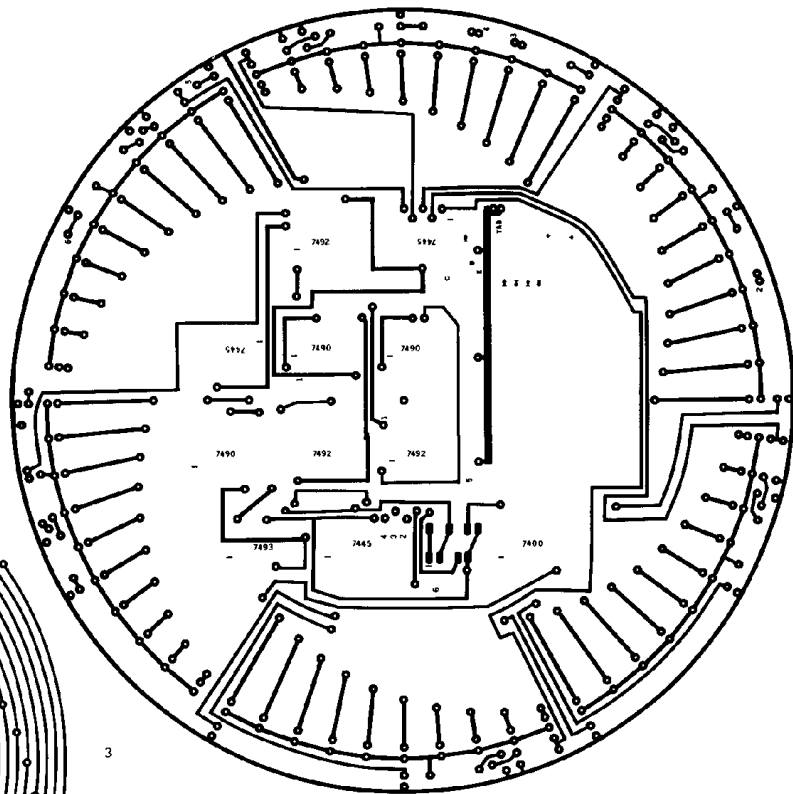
REAR FOIL PATTERN of double-sided PC board shown half size.
